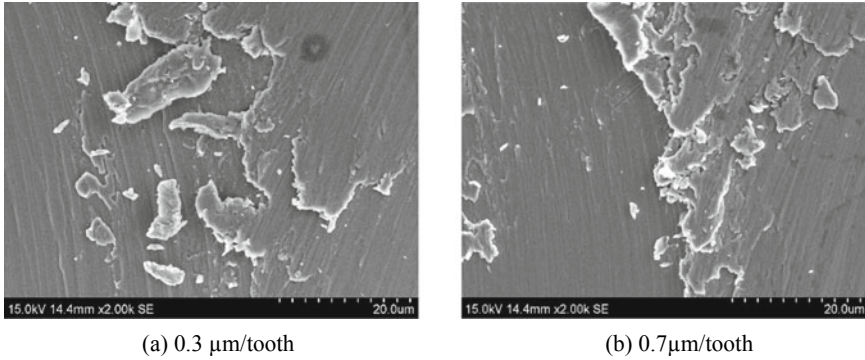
Surface defect on the machined surface at a feed per tooth of $0.3 \mu\text{m}$
